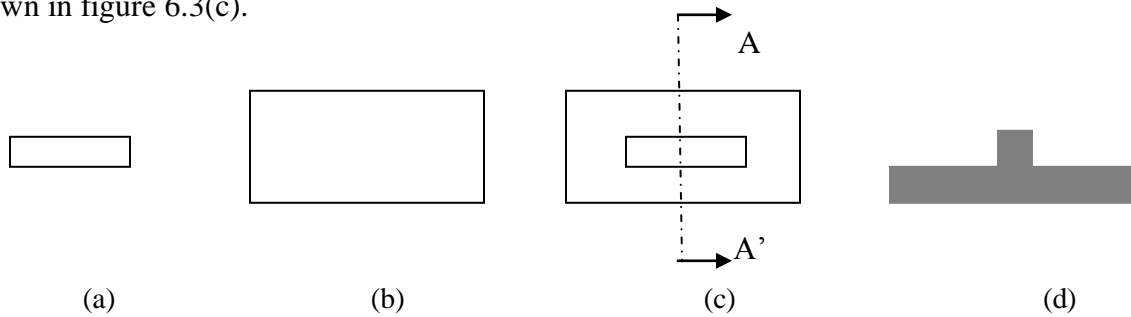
, (a) top view of the channel sized PMMA slab (b) top view of the core sized PMMA slab (c) top view of the mold made by bonding the two slabs (d) side view of the mold
